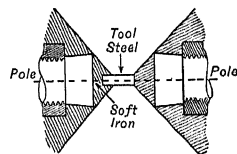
Pole Pieces for Parallel Rod Specimens.
